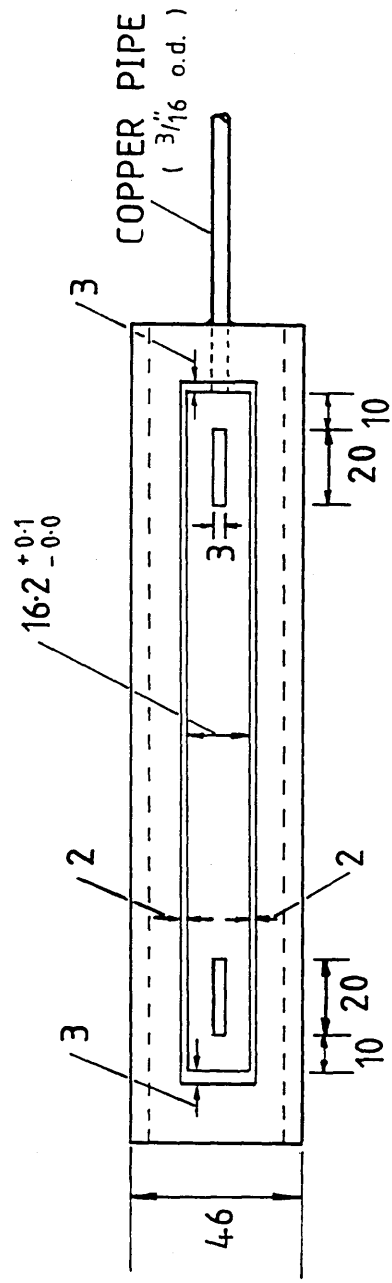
VACUUM PLATE FOR THICK ADHEREND SPECIMEN
